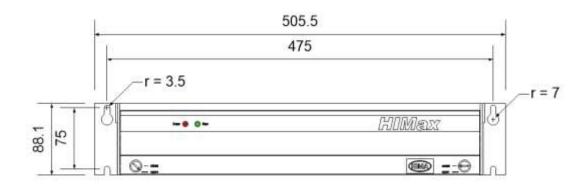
Dimension Drawing for System Fans 15 01 and 15 03
